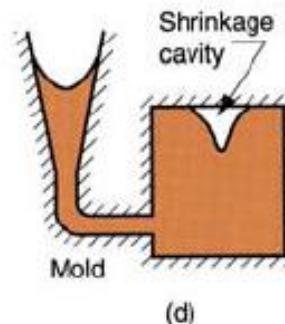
Some common defects in castings: (d) shrinkage cavity
